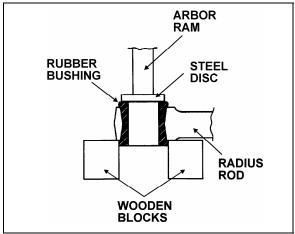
RADIUS ROD BUSHING REMOVAL 16011
